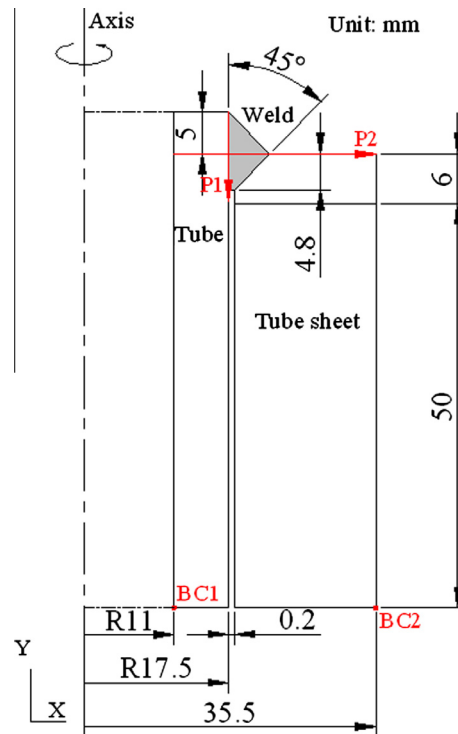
The geometrical model of tube to tube-sheet weld.
